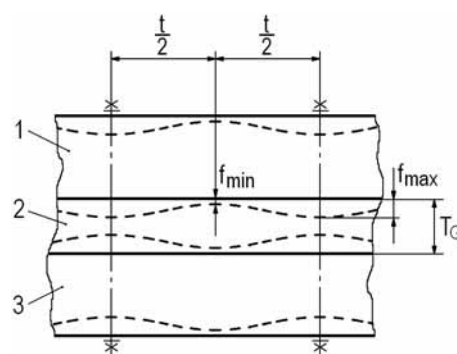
Circumferential deformation of flange: 1- flange; 2- gasket; 3- flange.
